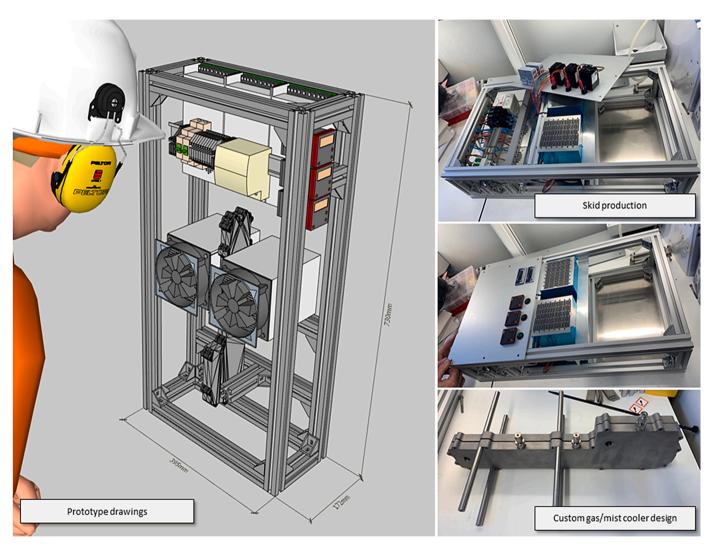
Demonstration prototype gas sampler machine drawing and constructed skid.
